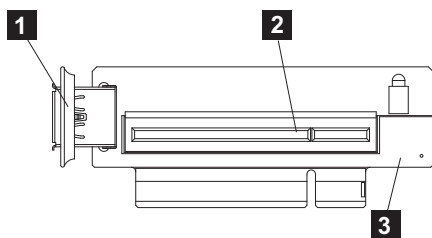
USB riser-card assembly (SAN Volume Controller 2145-CF8 shown)
